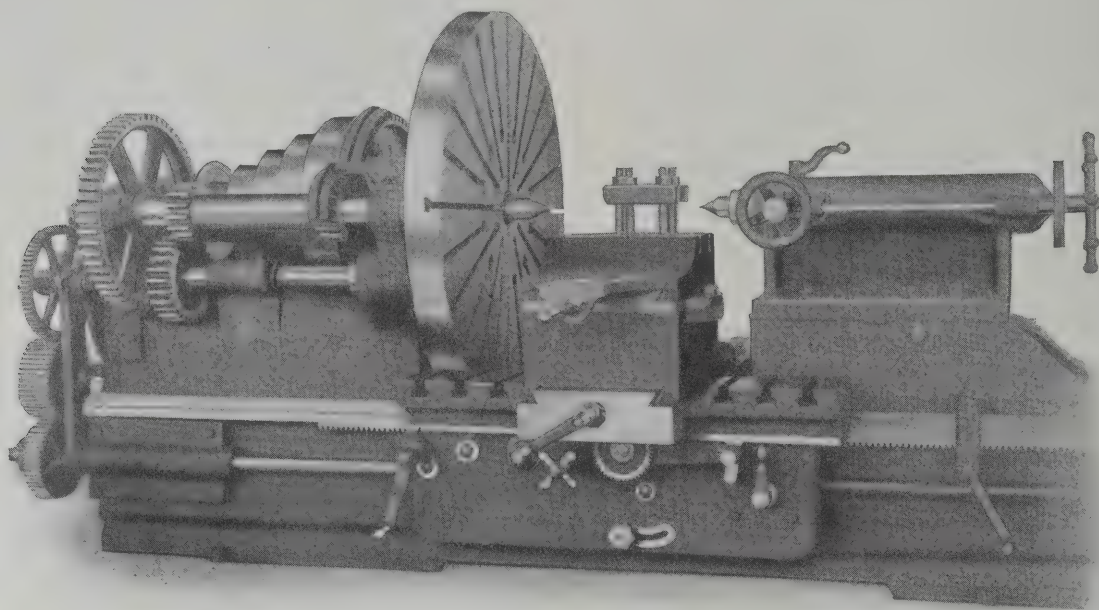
An Example of a New Line of Heavy Engine Lathes
